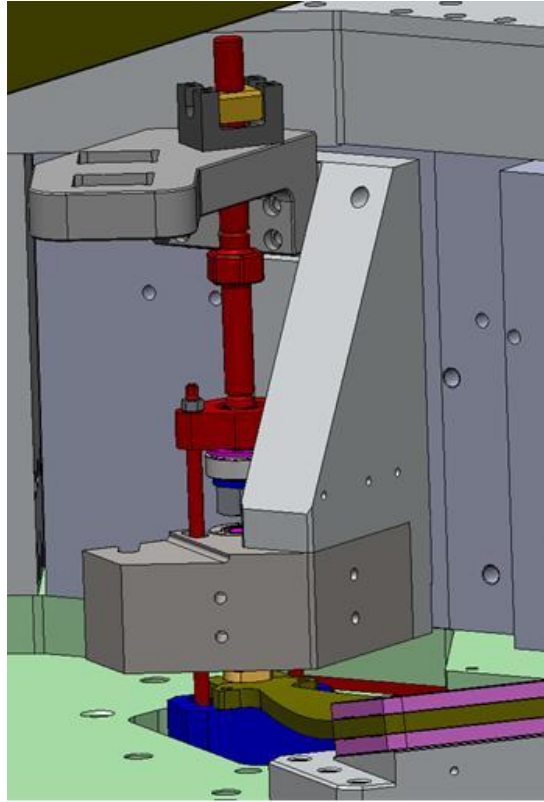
D0902454 Stage 1-2 Blade Puller and D0902103 Stage 1-2 Flexure Rod Assembly
